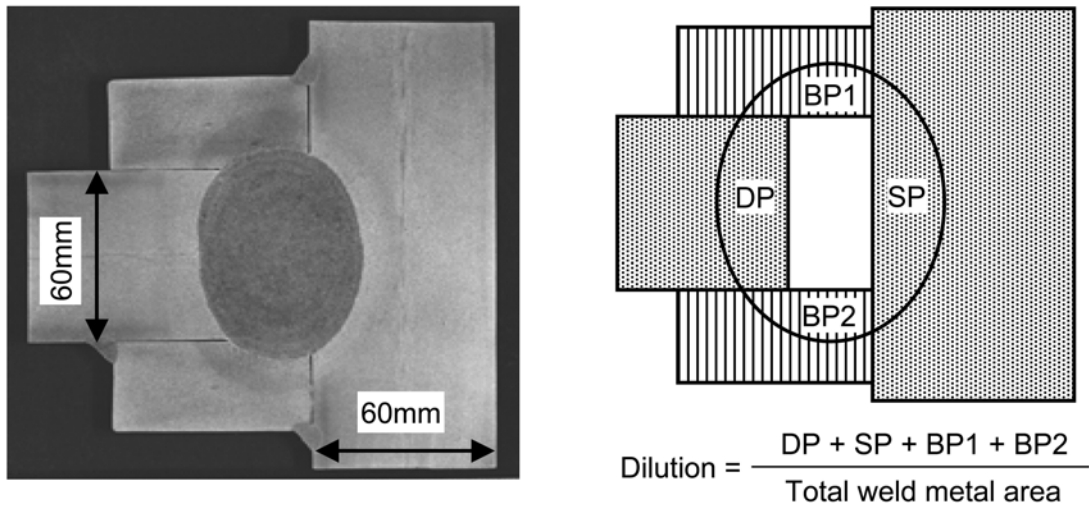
Macrostructure of the welded joint and definition of dilution.
